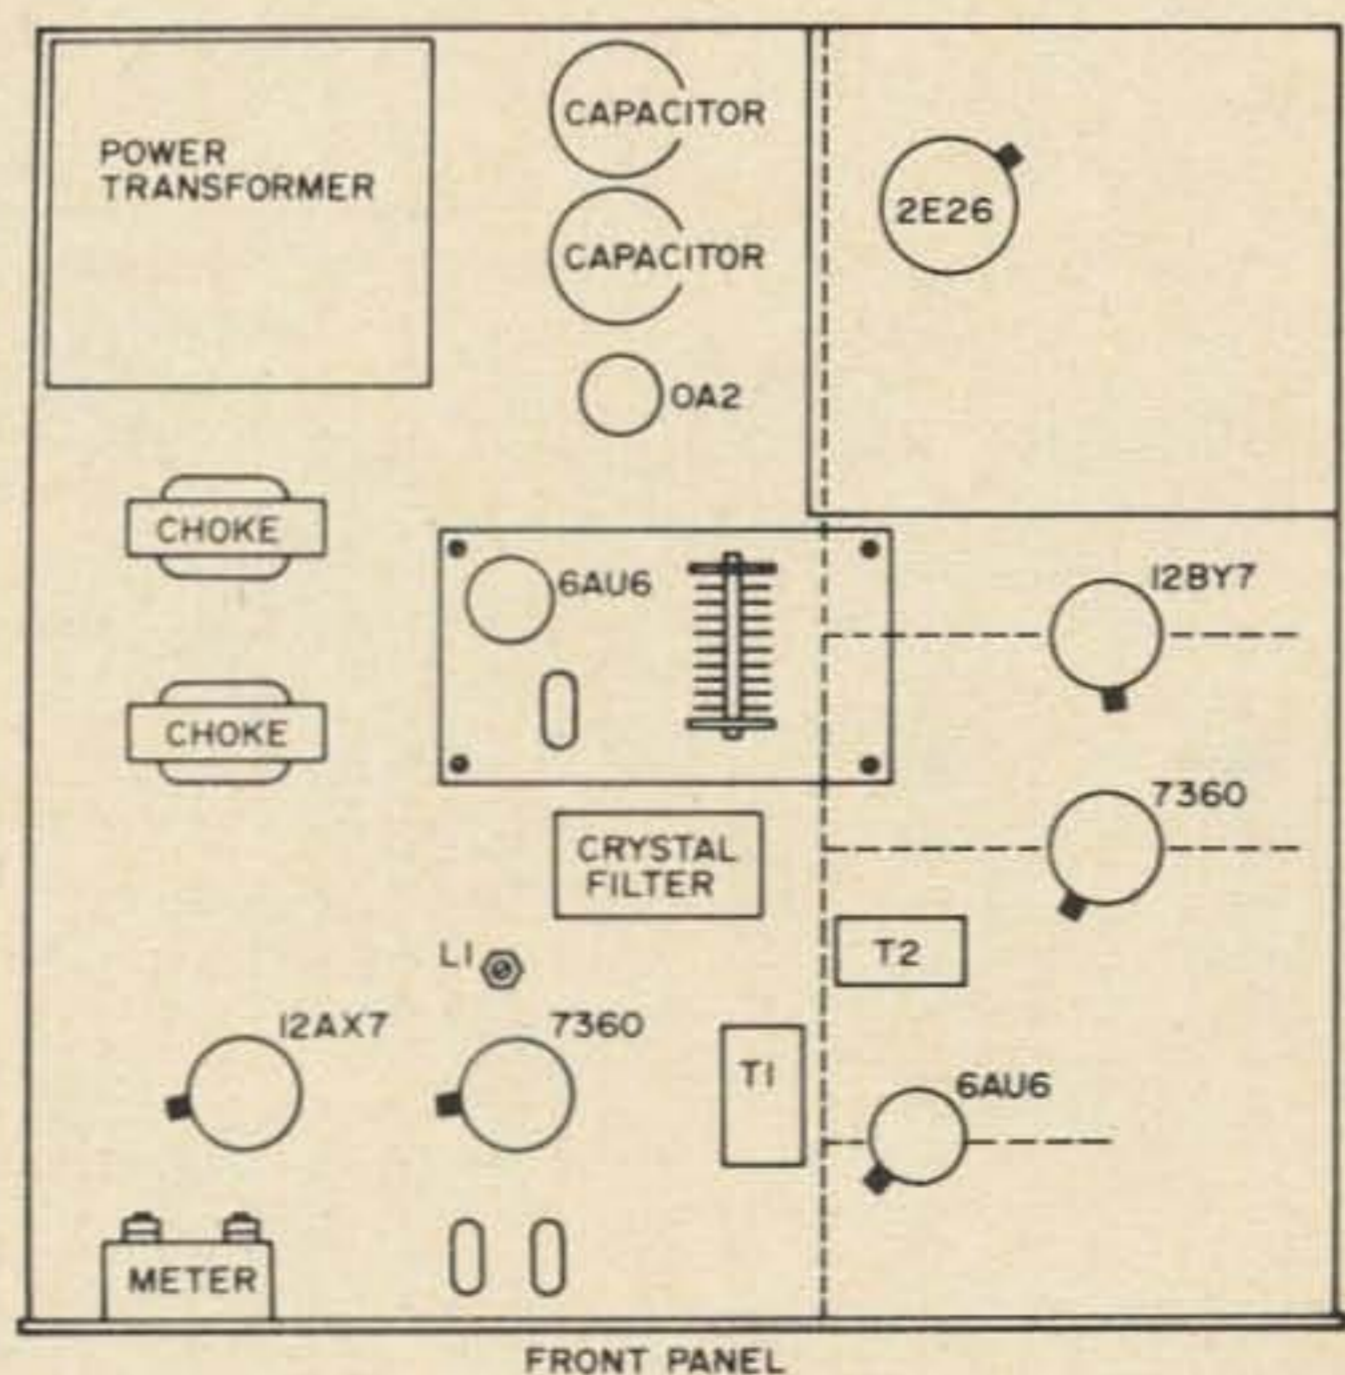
Component layout viewed from above. Dashed lines indicate partition placement below chassis. The tab at each socket indicates position of pin 1.
